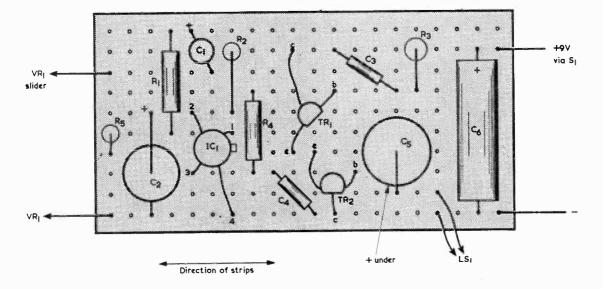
The component side of the Veroboard assembly. VR1 and S1 are external to the board RADIO & ELECTRONICS CONSTRUCTOR
